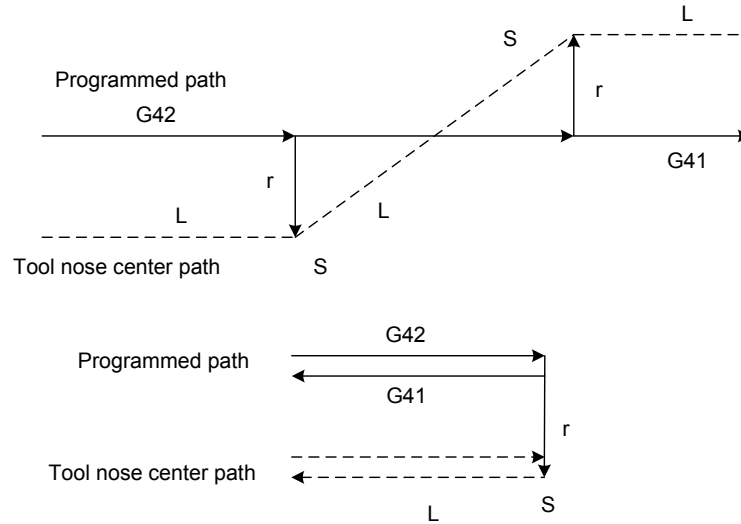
Linear—linear, no intersection (changing compensation direction)
